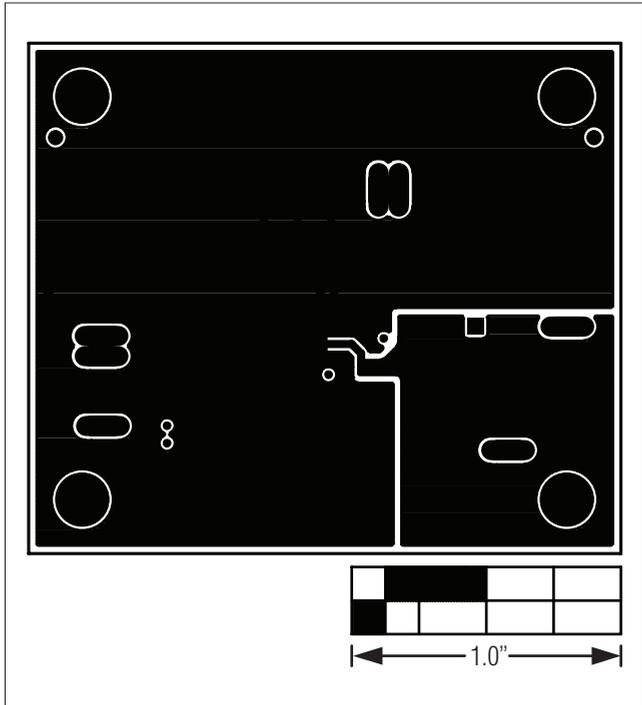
MAX15051 EV Kit PCB Layout—Inner Layer 2
